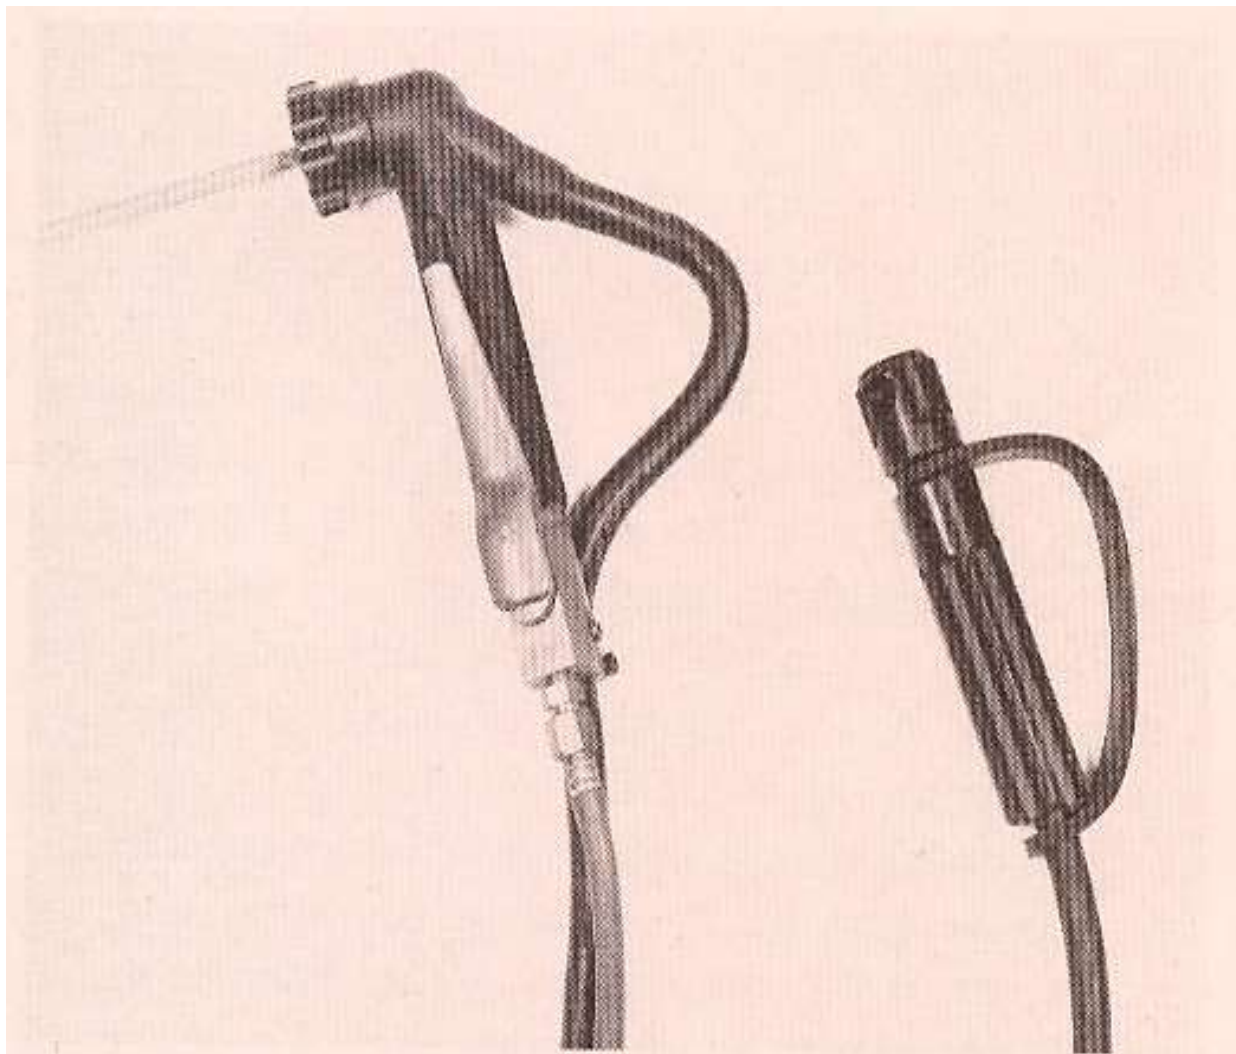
Underwater electrode holder for welding and cutting.
